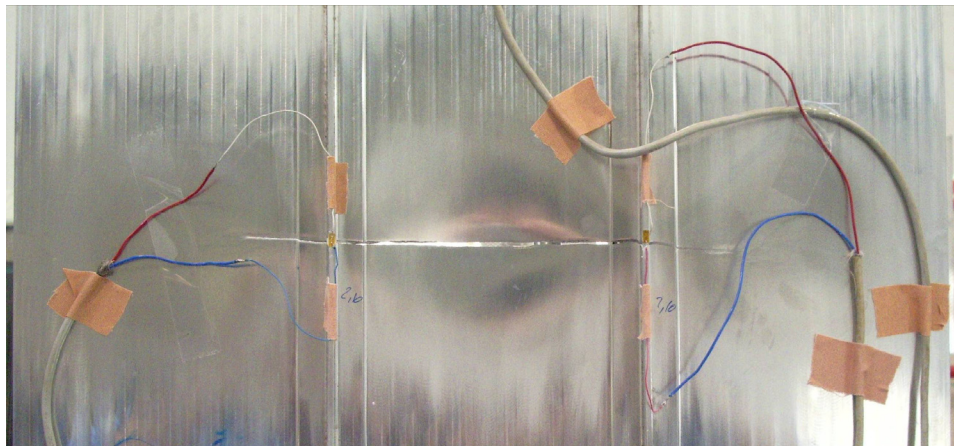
Fatigue crack just outside the stiffeners.
